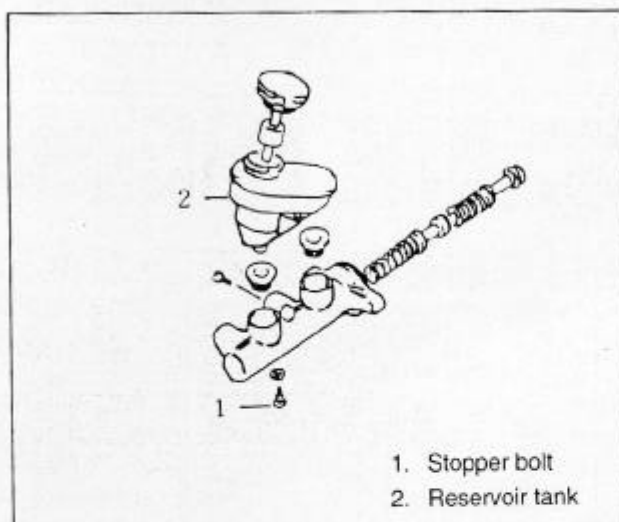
31 MASTER CYLINDER DISASSEMBLY
